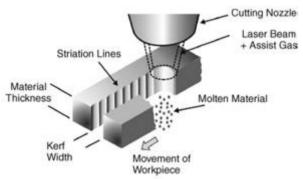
Schematic diagram of laser cutting process Stainless steel cutting by Laser
